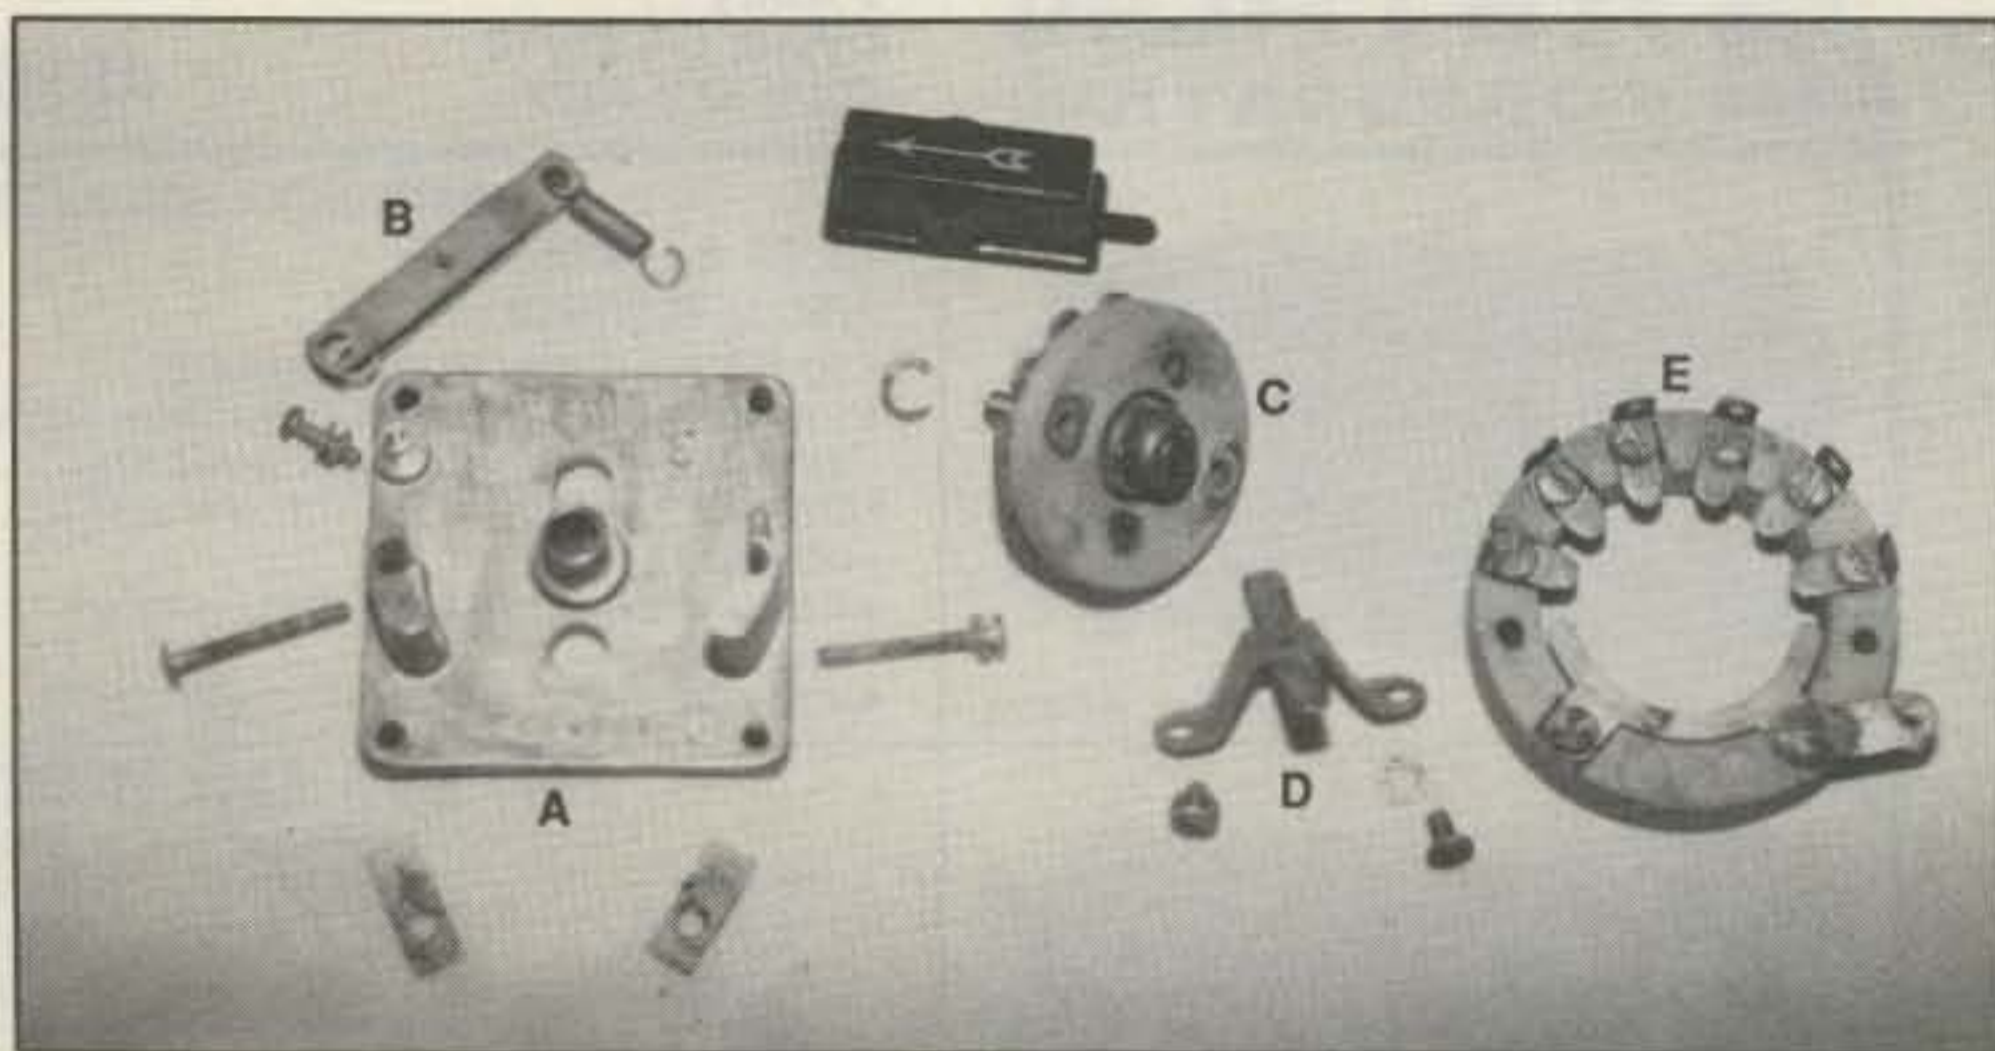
One "stock" RF switch deck completely disassembled. Shows all the component parts and is roughly an assembly guide. The components labeled are: (A) Front plate, (B) Detent mechanism, (C) Ceramic disc to which V-shaped bracket is attached, (D) V-shaped bracket with two-piece rotary contact attached, (E) Ceramic wafer with six stationary contacts across the top and "C"-shaped contact on which rotary contact slides across the bottom.
